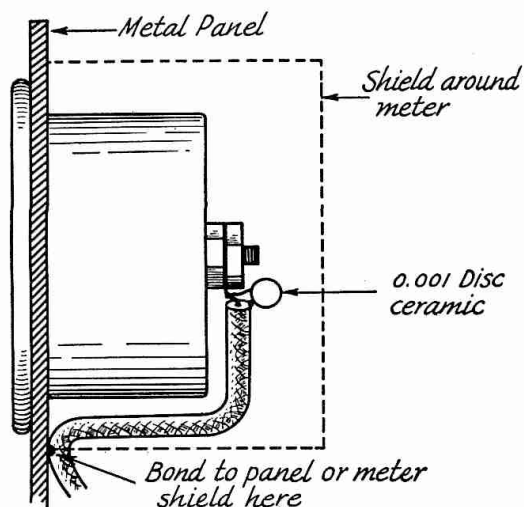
Meter shielding and bypassing. It is essential to shield the meter mounting hole since the meter will carry r.f. through it to be radiated. Suitable shields can be made from 2½- or 3-inch diameter metal cans or small metal chassis boxes.
